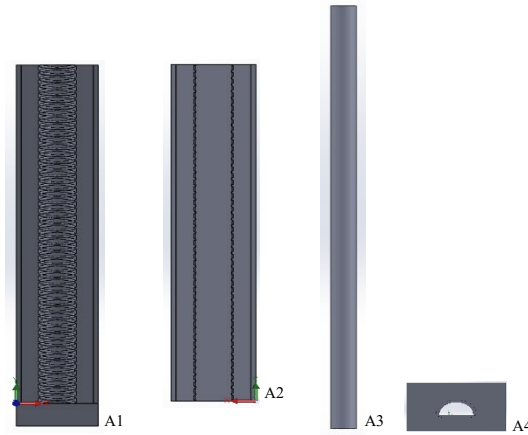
Top view of molds design of inner rubber layer, rod and holder.
